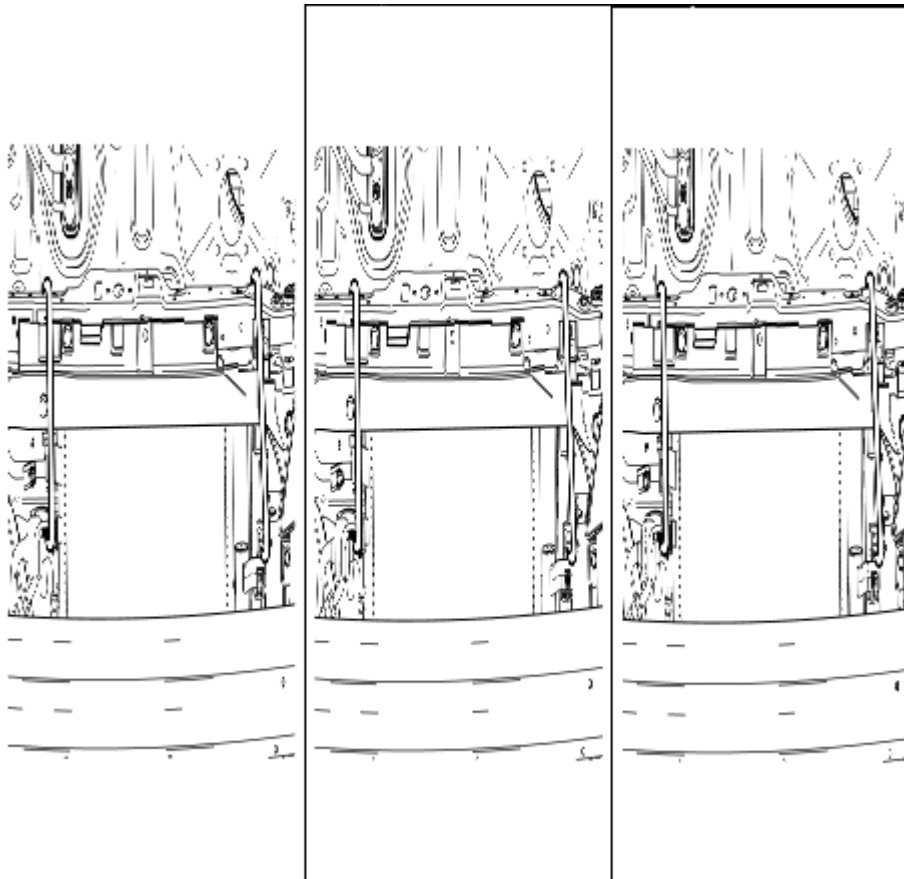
Securing Cooling Module To Left And Right Of Upper Body Structure With A Wire
